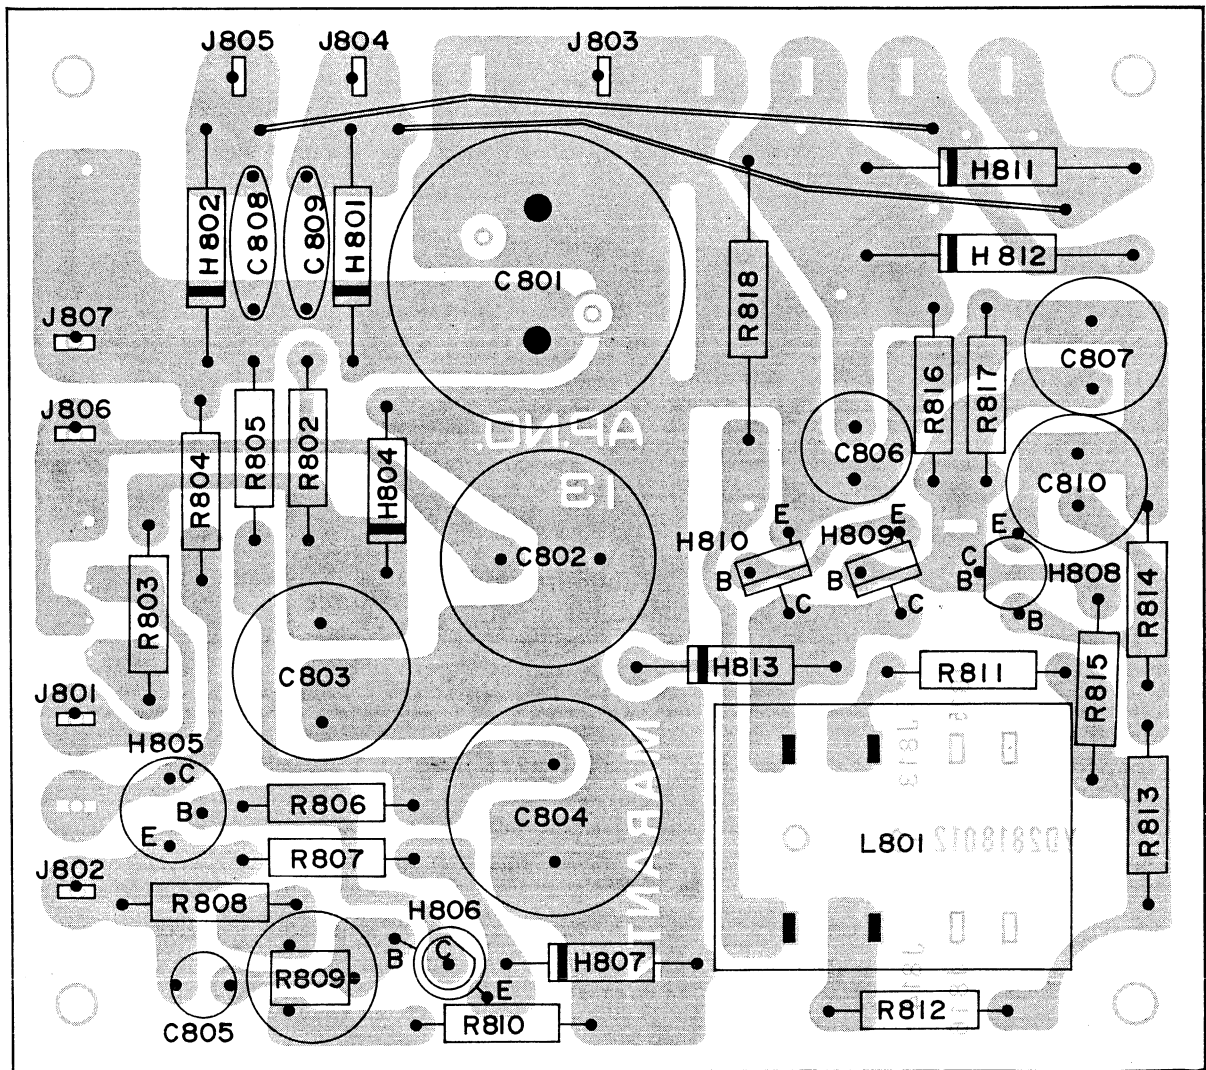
Regulated Power Supply and Protection Relay Circuit Assembly P800 Component Locations
